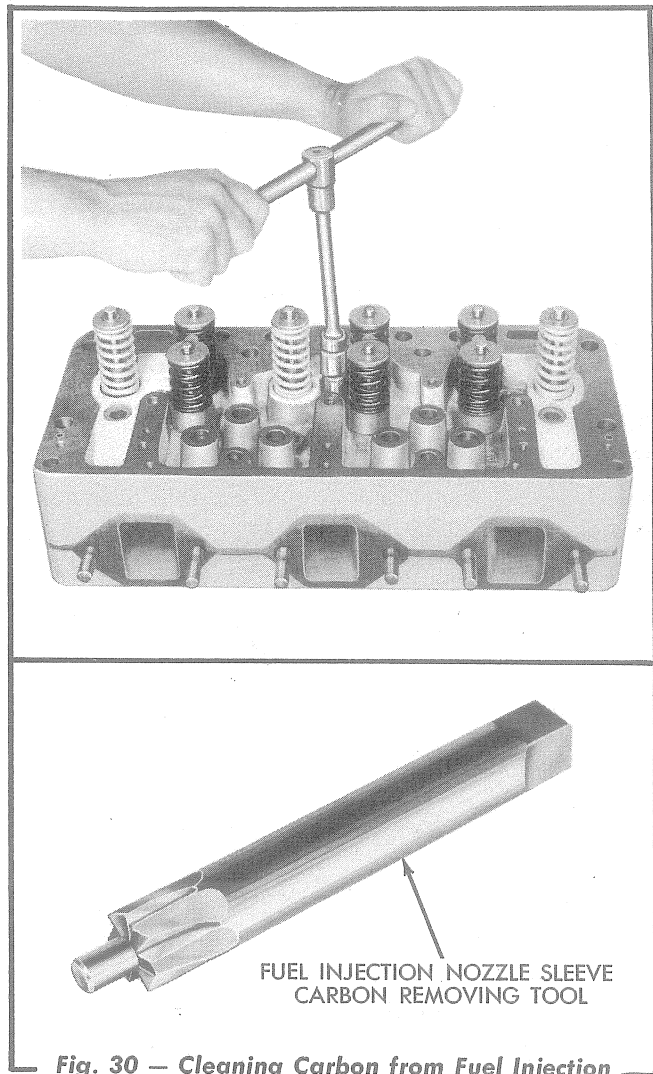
Cleaning Carbon from Fuel Injection Nozzle Sleeve (Tractors Serial No. 4001 and Above)
